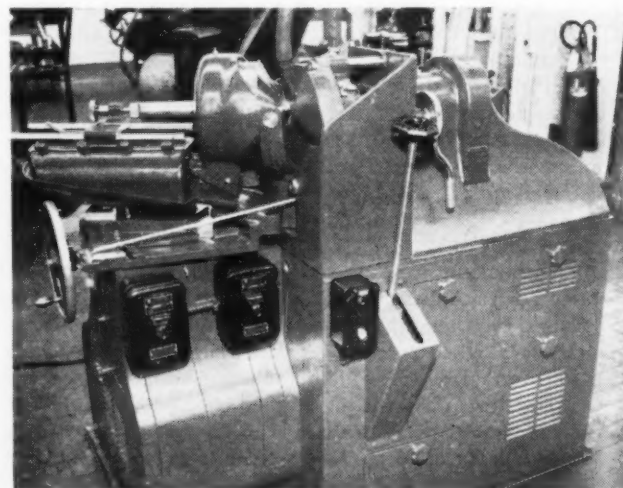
LARGE DRILL GRINDER AS DEVELOPED AT THIS YARD FOR GRINDING $\frac{3}{4}$ TO 3-IN-DIAM DRILLS
